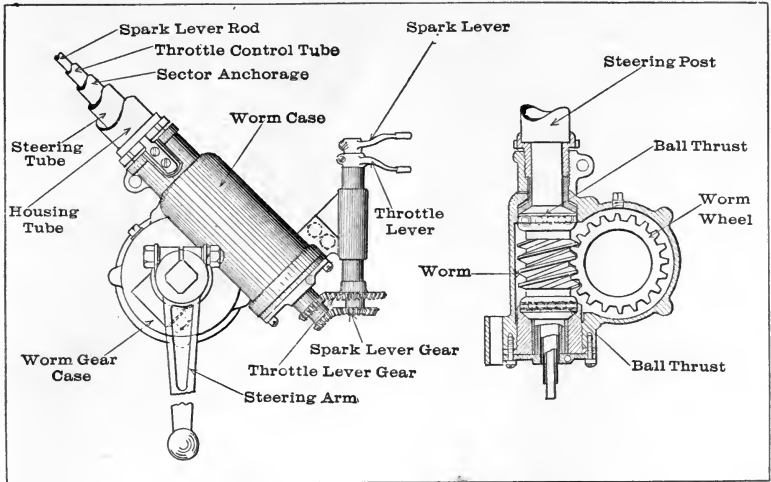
Construction of Worm and Worm-Gear Reduction Gearing for Steering Purposes.
